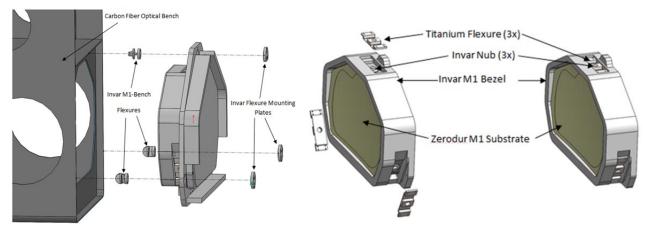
Typical Mirror Mount – Bonded Flexure Design in Invar Bezel
